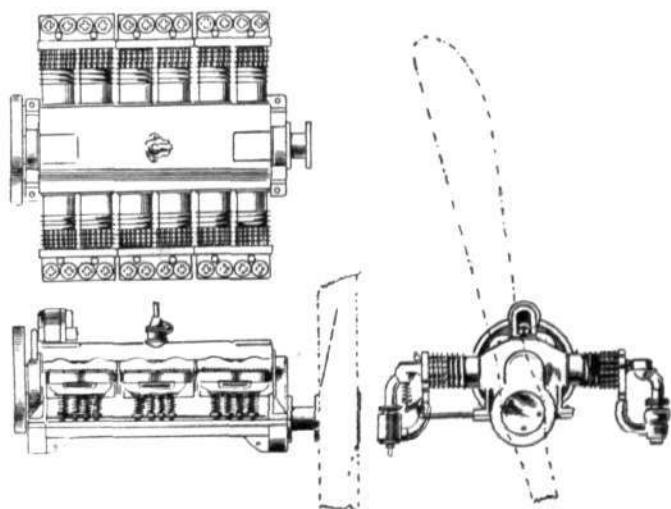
Plan, end and side elevations of the 12-cyl. 105 h.p. Ashmussen aero engine. These drawings show the connections between the cylinder heads and carburetors through which the air passes to the latter from the cooling flutes.
